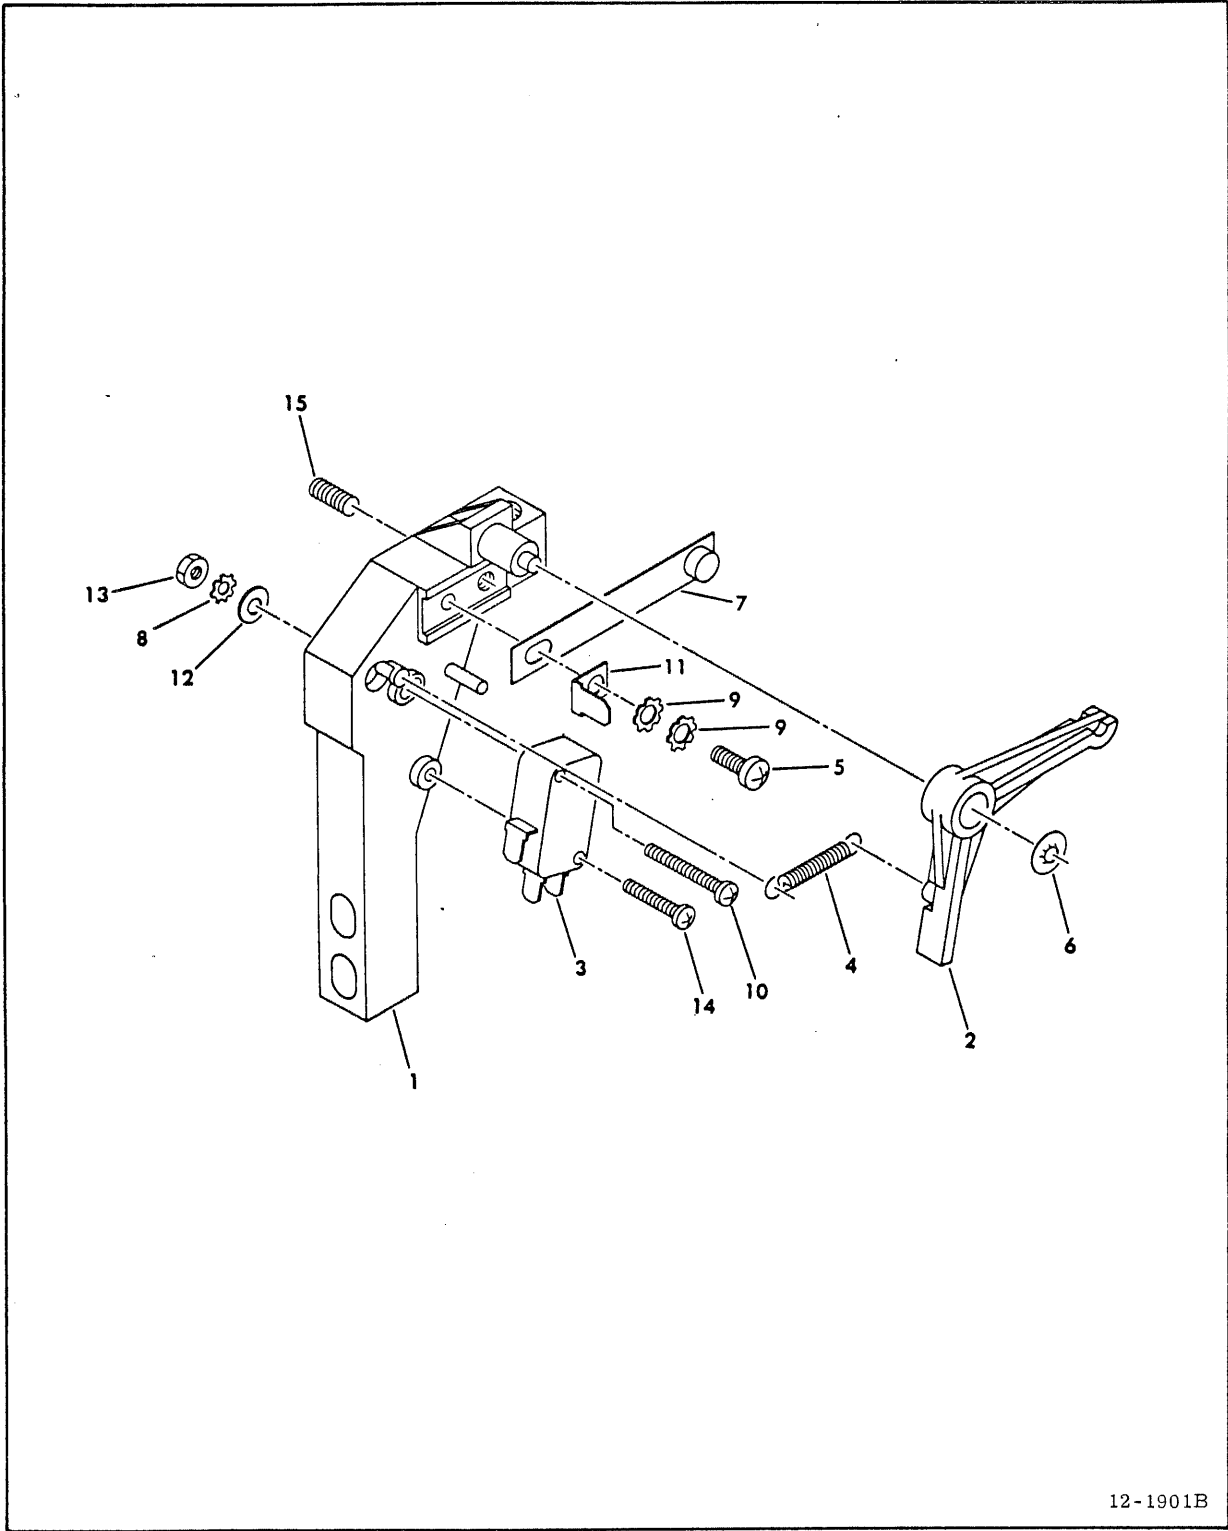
A-21. Pack Sensor Assembly (S/C 08 and Below)
